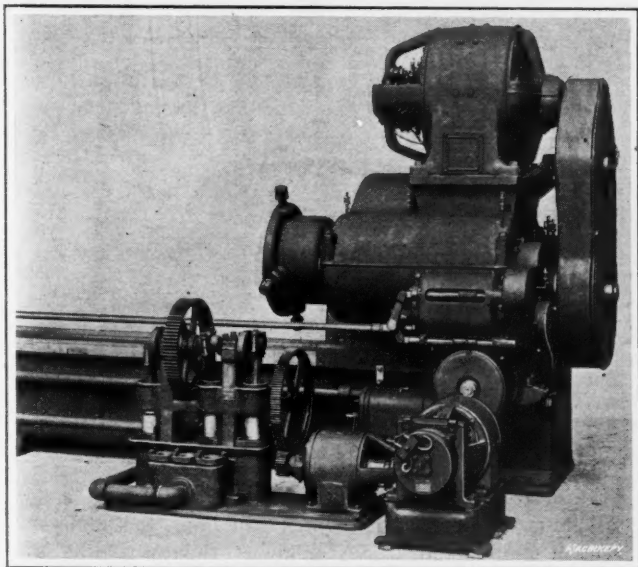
Close Rear View of Head End of Lathe, showing Motor Mounting
